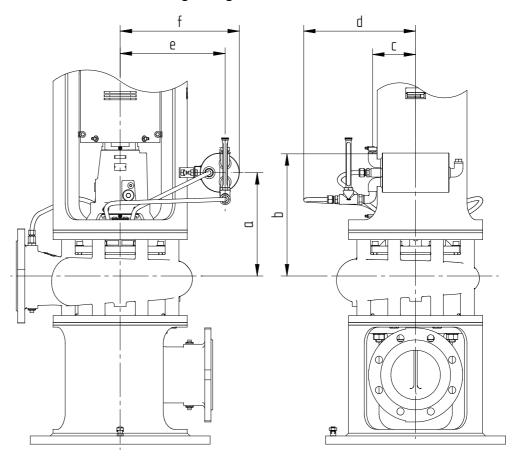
Shaft sealing configuration MQ2-MQ3-CQ3.
